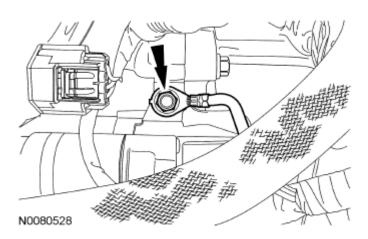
Locating Ground Wire Nut Courtesy of FORD MOTOR CO.
